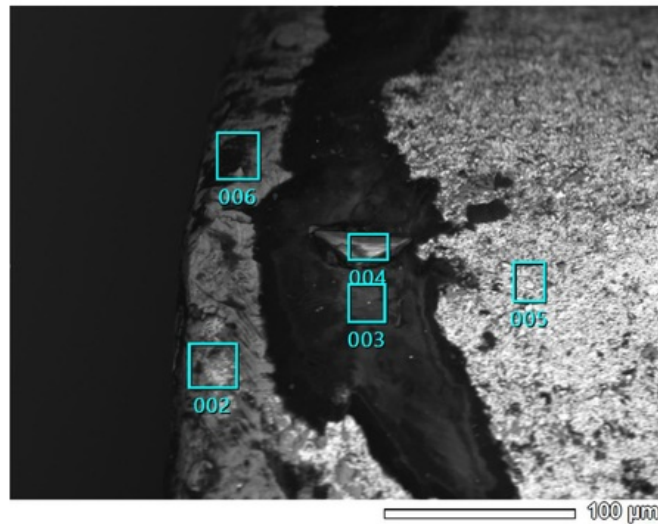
TNNG cutting tool after Optimal machining commercial Ti-64.
